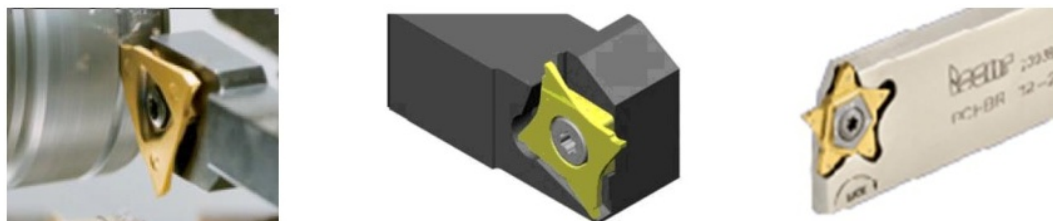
Groove cutters with lateral mounting of multifaceted plates
